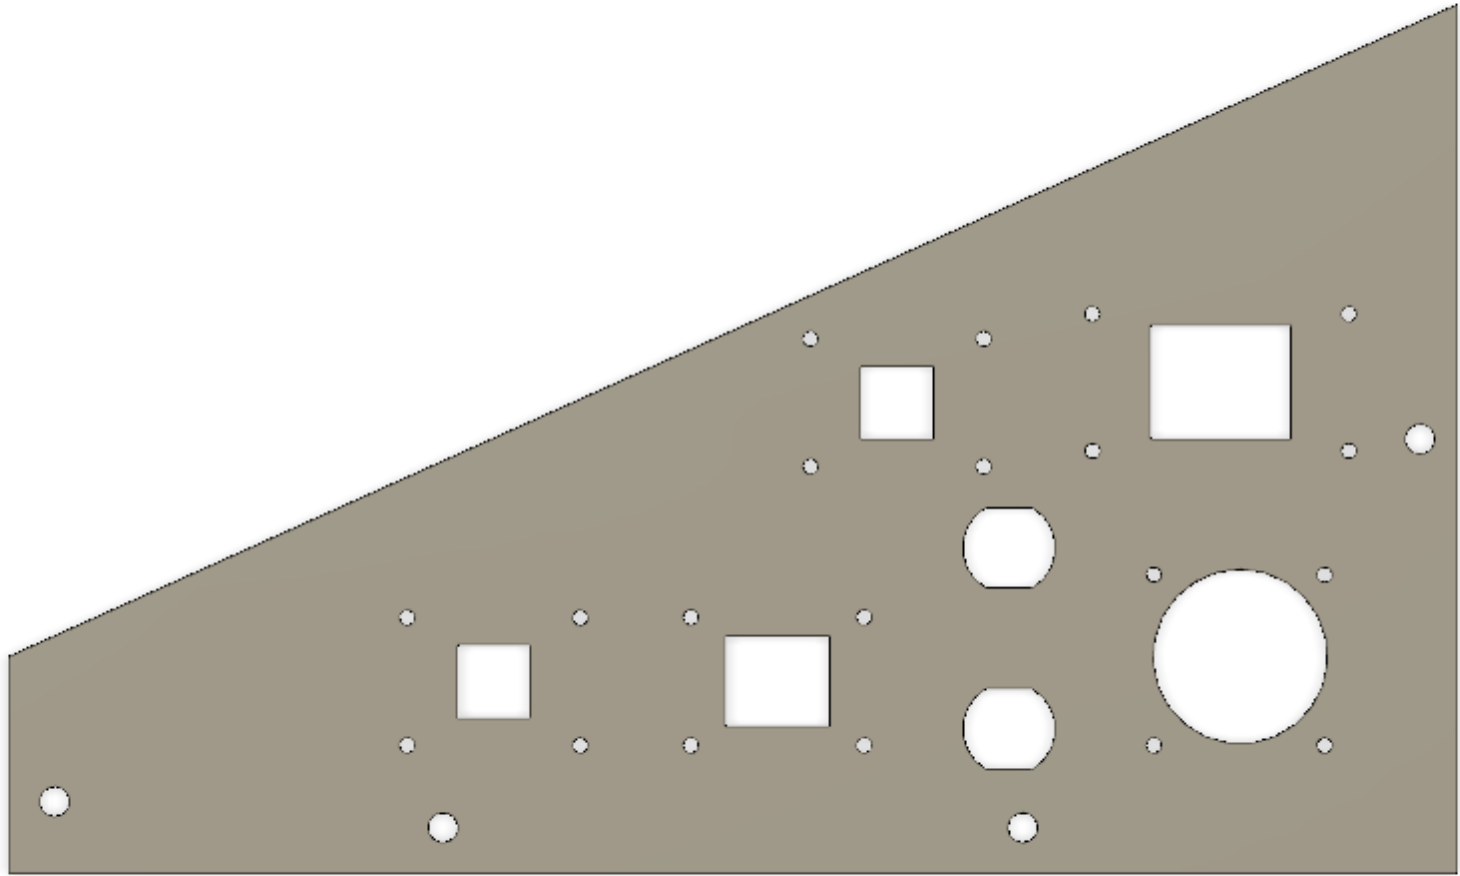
Enclosure Chin plate. This plate holds the clasps that lock the enclosure
